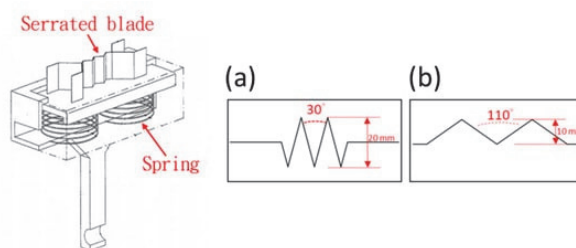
A schematic of a cutting tool for dried longan pulp. (a) A cutter with the blade width of 20 mm and 30° serrated bending angle. (b) A cutter with the blade width of 10 mm and 110° serrated bending angle.
